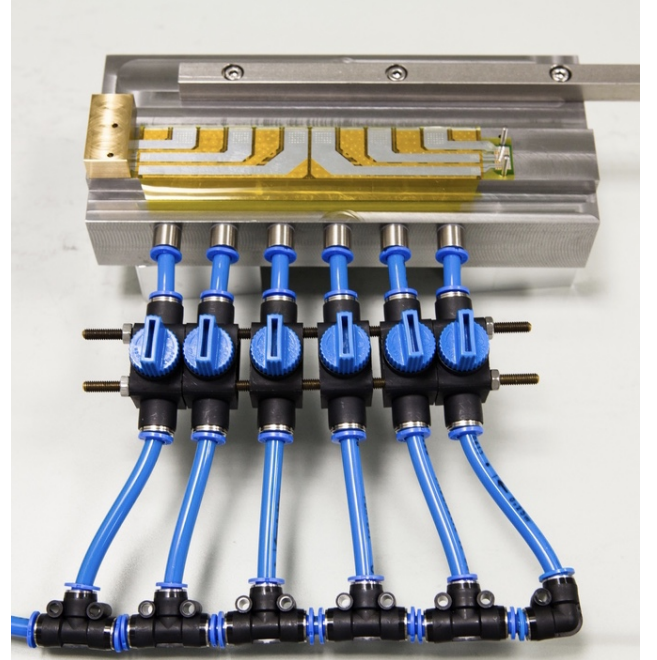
Prototype ladder for the inner pixel layers after gluing on mounting tool.
